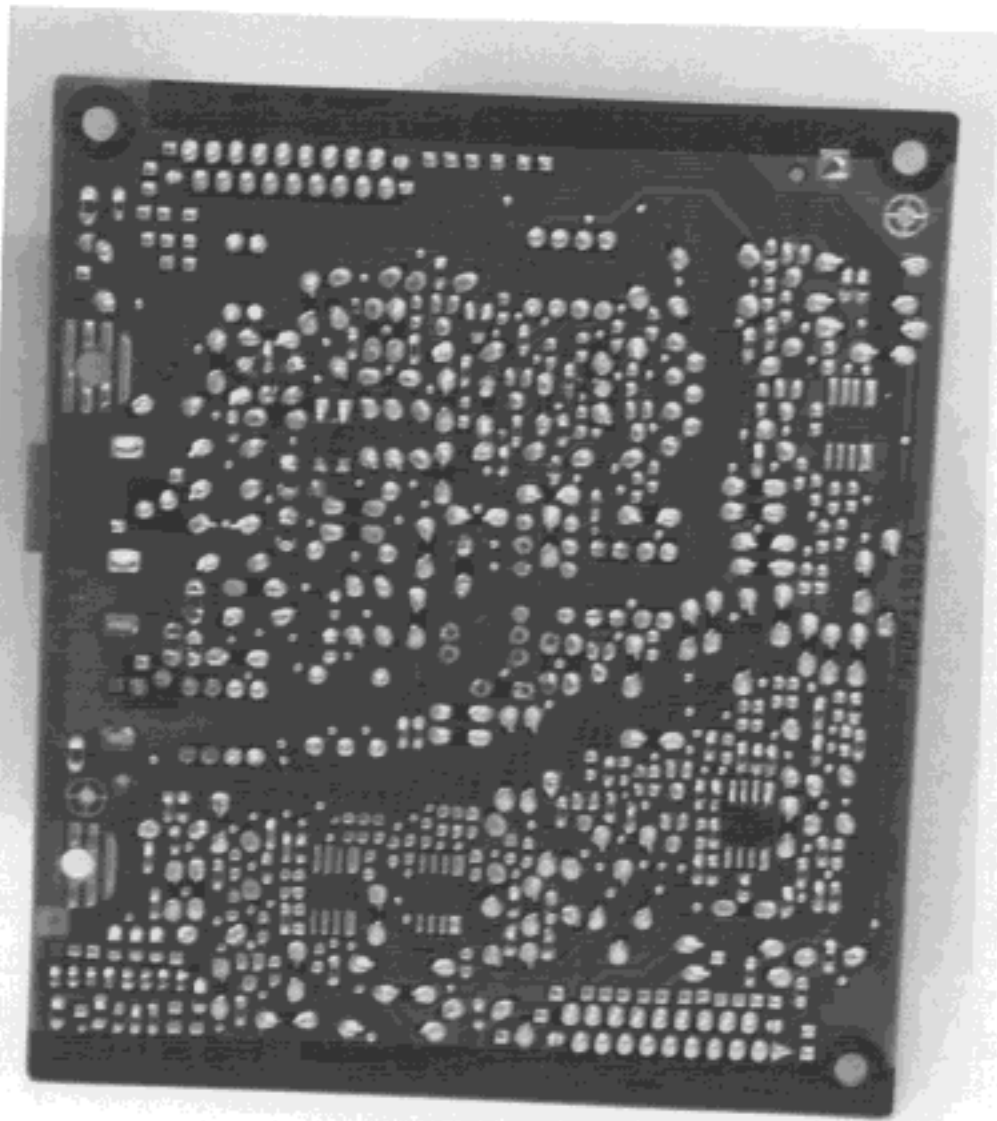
HIGH VOLTAGE BOARD COMPONENTS SIDE
